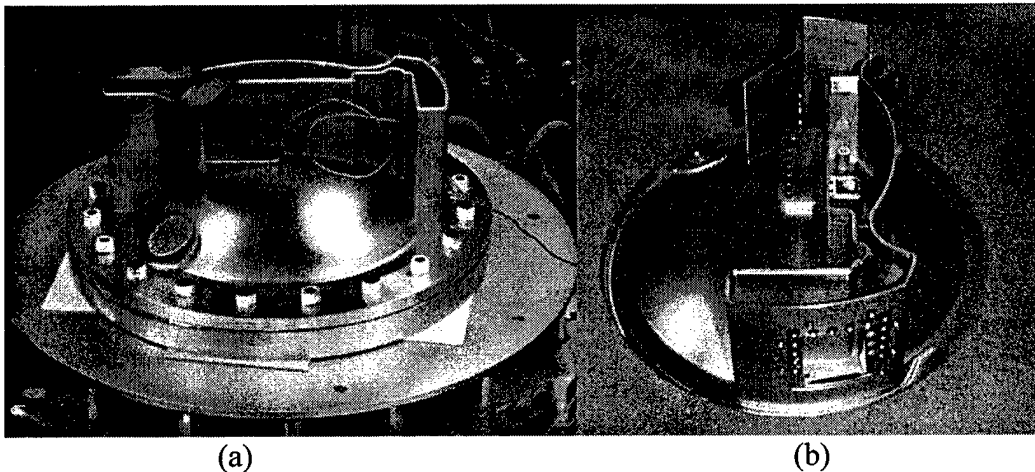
(a) LENS Built Component Ready for Heat Treatment and (b) After Completion of Finish Machining
